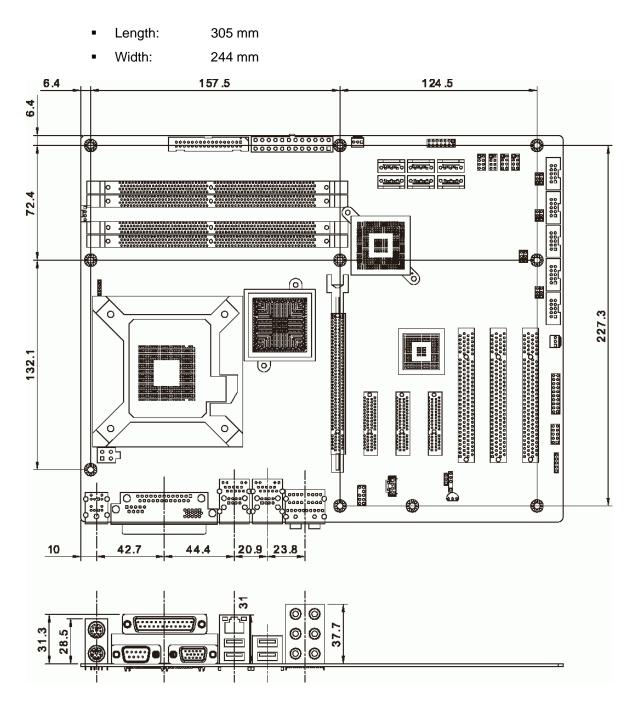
IMBA-XQ354S Dimensions (mm)
